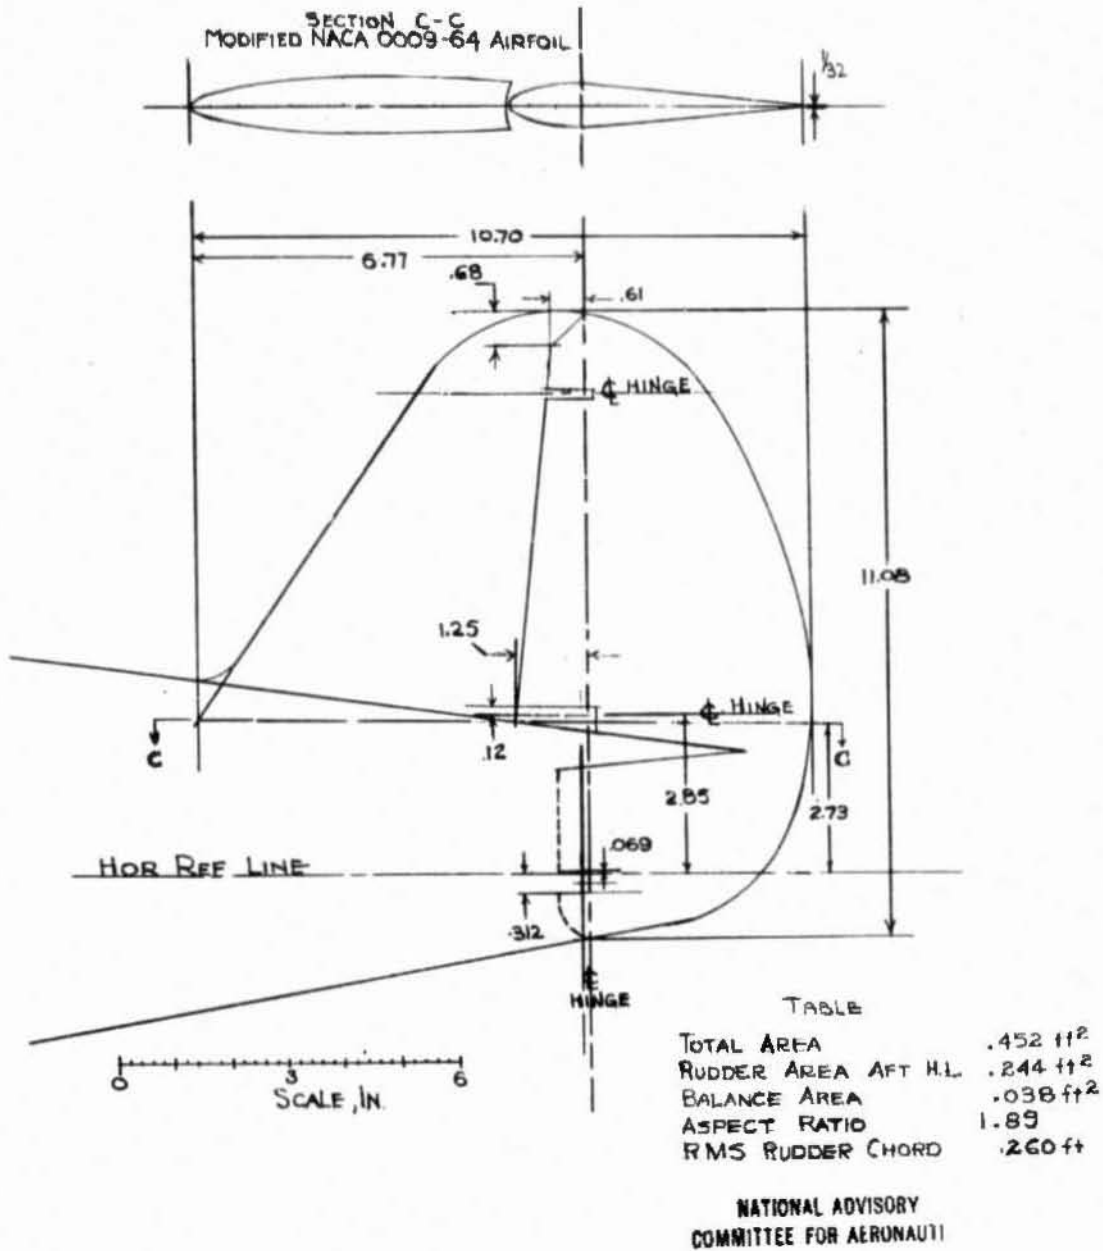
PLAN AND SECTION VIEWS OF TAIL VR ON 1/8-SCALE XP-62 AIRPLANE MODEL.
